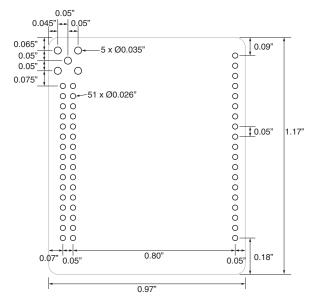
EVM-xxx-DT PCB Layout Dimensions
